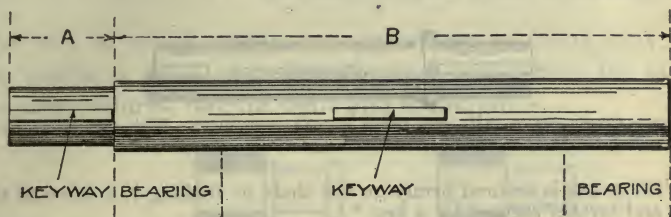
Usual form of shaft for a stationary engine. The crank arm is fitted to the end A, which is turned to slightly reduced diameter. The keyway in the central portion is for the fly wheel.
